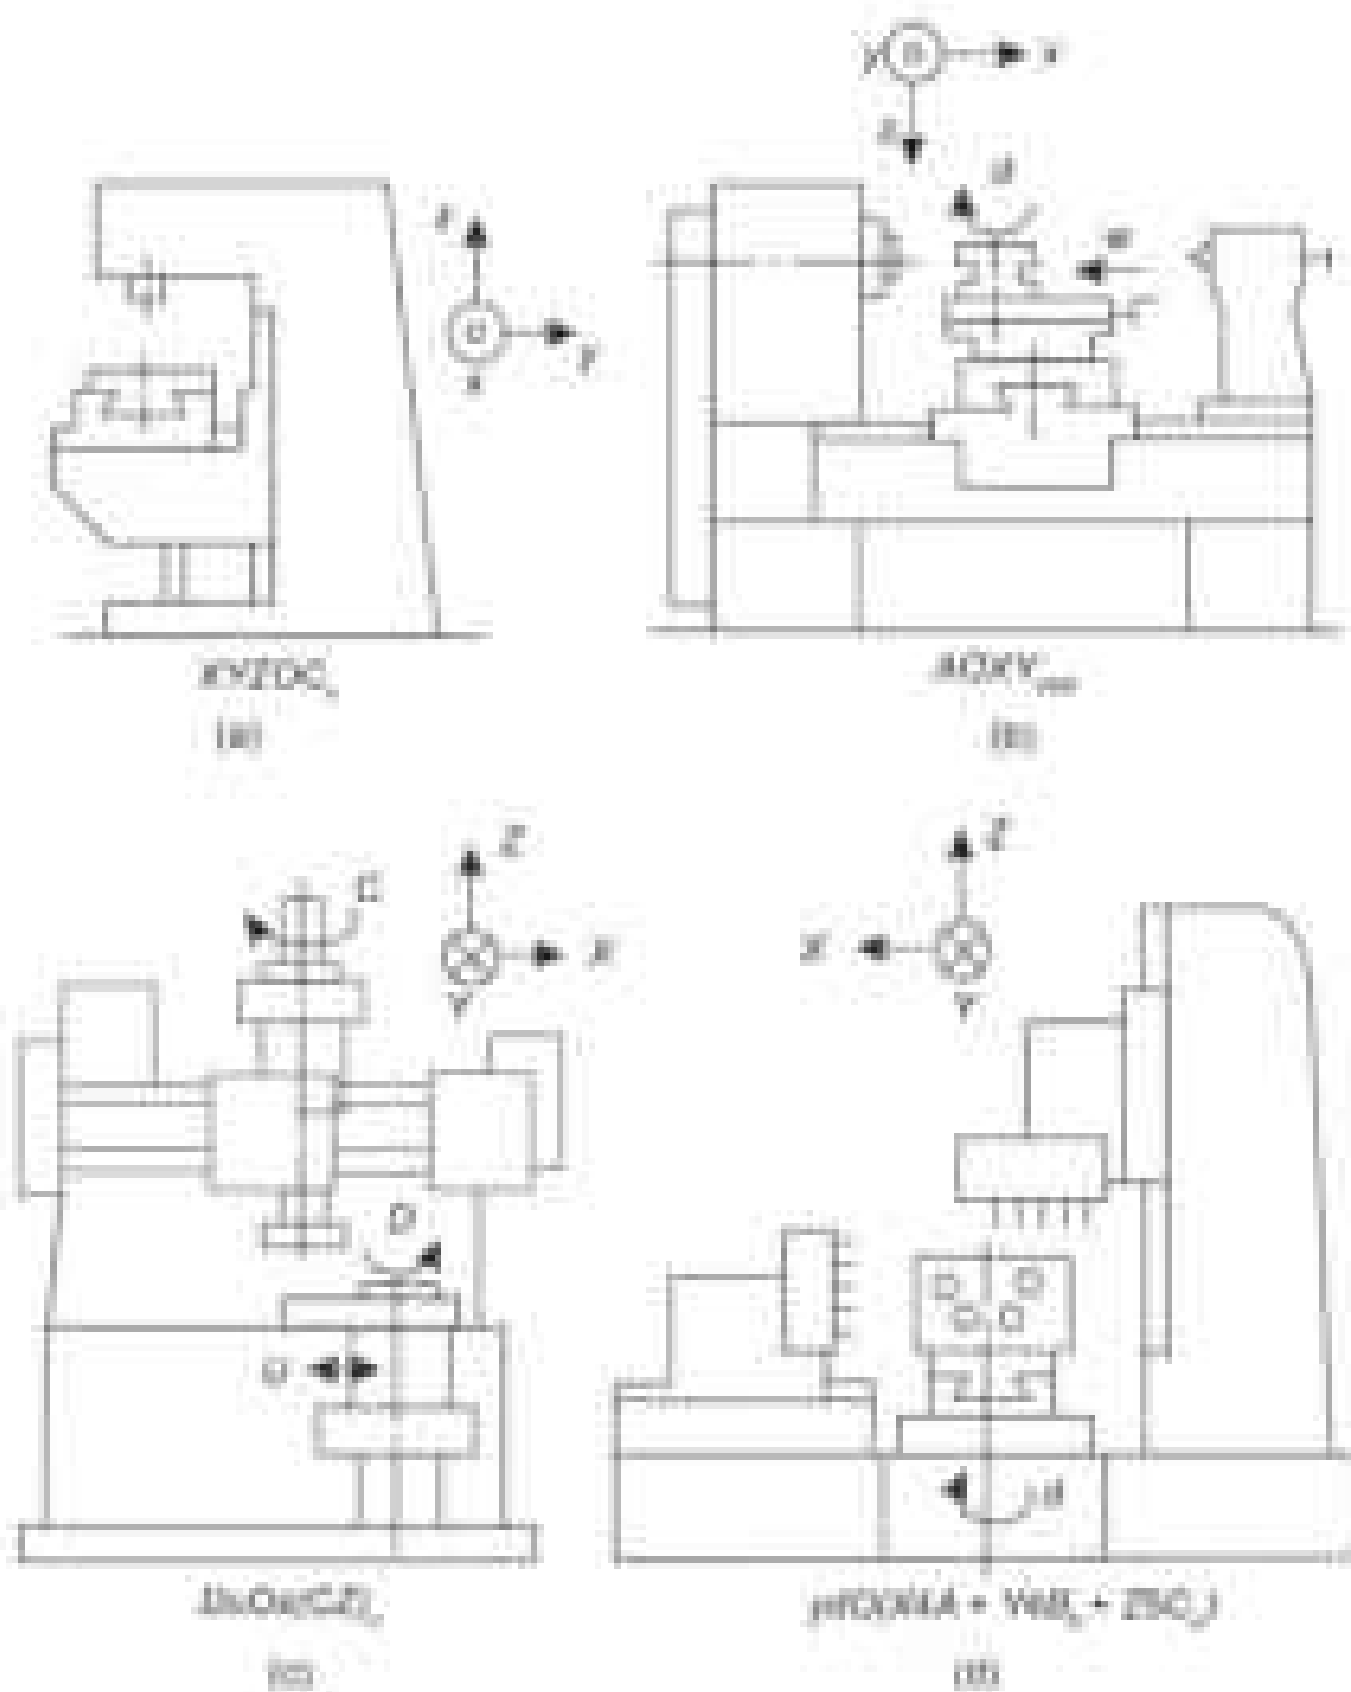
Layout and layout formulae for: (a) Knee-type vertical milling machine (b) Lathe (c) Gear-shaping machine (d) Uni-bolt drilling machine
